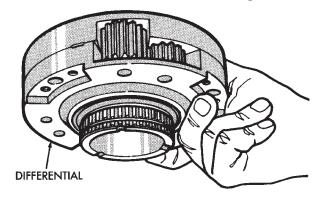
Installing Mainshaft Bearing Rollers and Spacers
